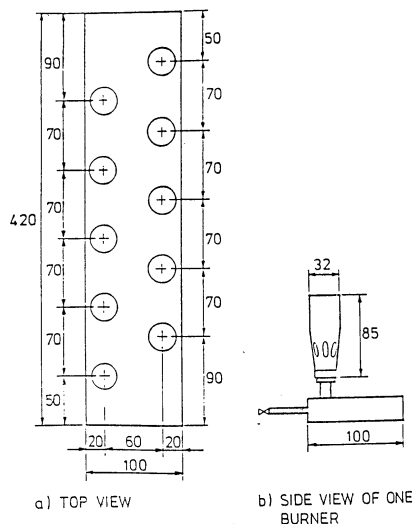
FIRE ENDURANCE TEST BURNER ASSEMBLY
